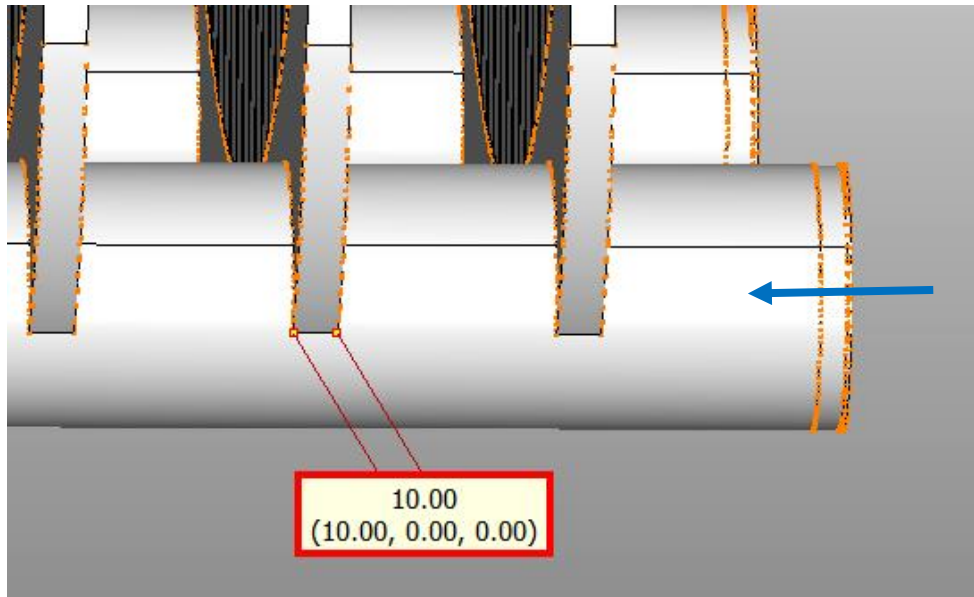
Details of the cavities edges and acoustic path considered [Ref. 3.4.4].
